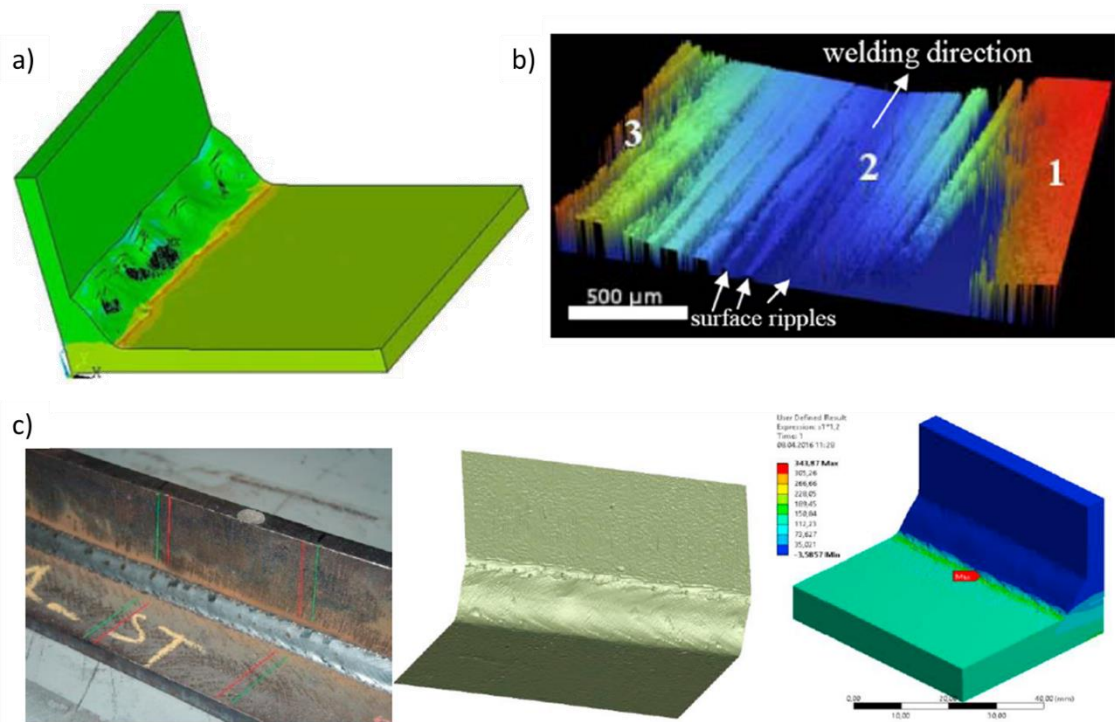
a) 3D stress profile of the weld geometry using laser scanning, from [72]; b) weld toe topography scan using a 3D optical profiler, from [73]; c) 3D profile of a fillet welded joint using the FARO laser scanning system, from [75].
